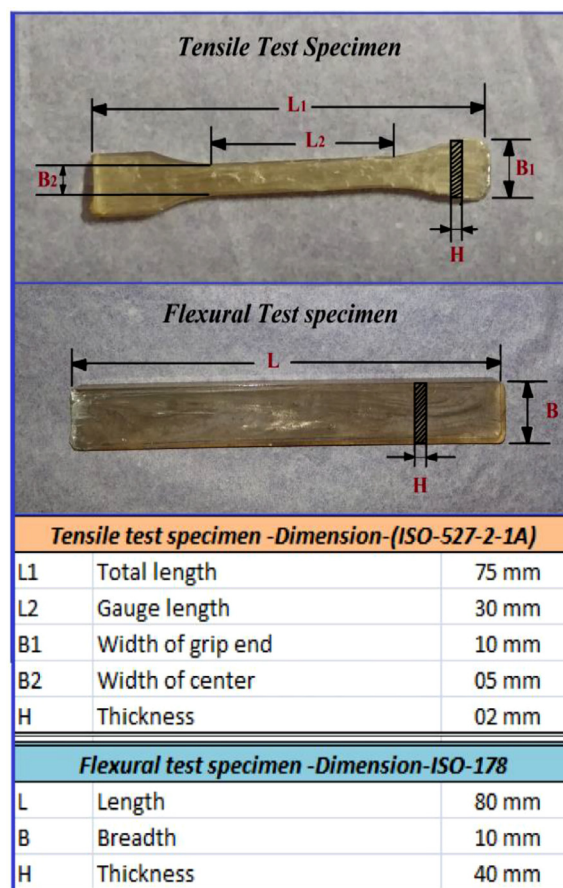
Dimensions of injection molded specimens for tensile and flexural measurements as per ISO standards.
